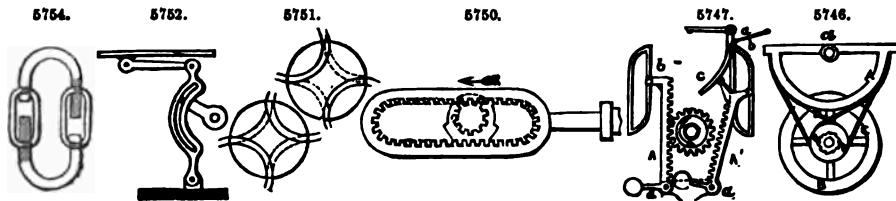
C. Parsons's device for converting reciprocating motion into rotary, an endless rack provided with grooves on its side gearing with a pinion having two concentric flanges of different diameters. A substitute for crank in oscillating cylinder engines.
